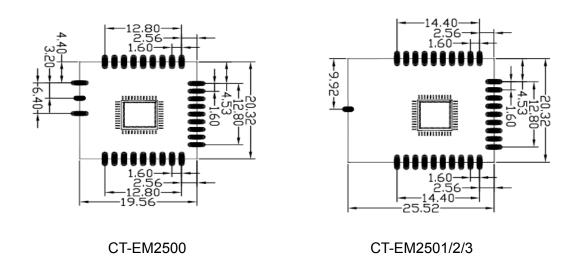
Mechanical Dimensions of CT-EM2500 and CT-EM2501 modules
